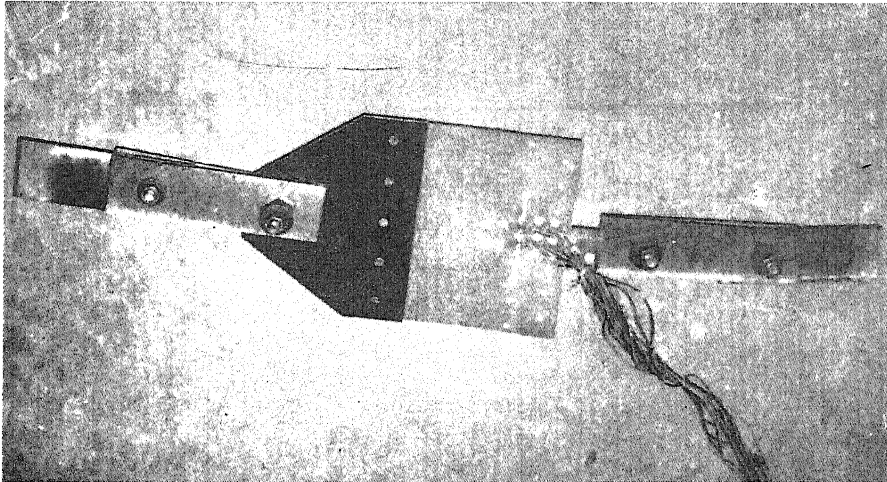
PHOTOGRAPH OF THE ASSEMBLED
